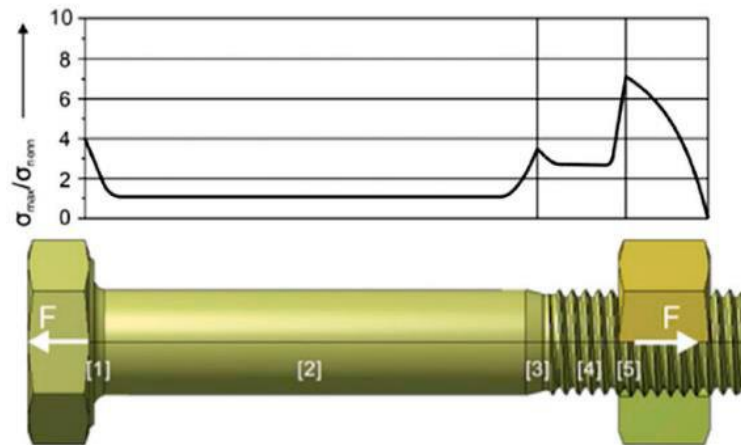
Fatigue failure locations in bolted assemblies [62]
